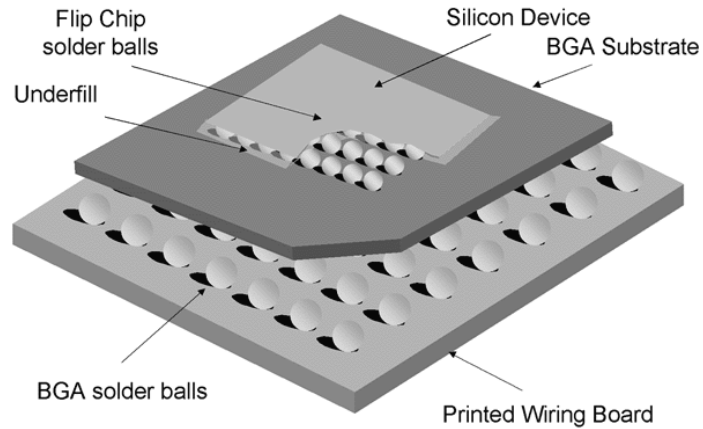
Schematic of solder joint in electronic packaging (Frear, 1999)
